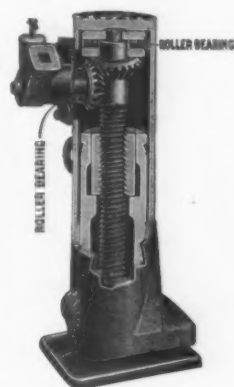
Sectional View of Roller Bearing Ratchet Screw Jack.
